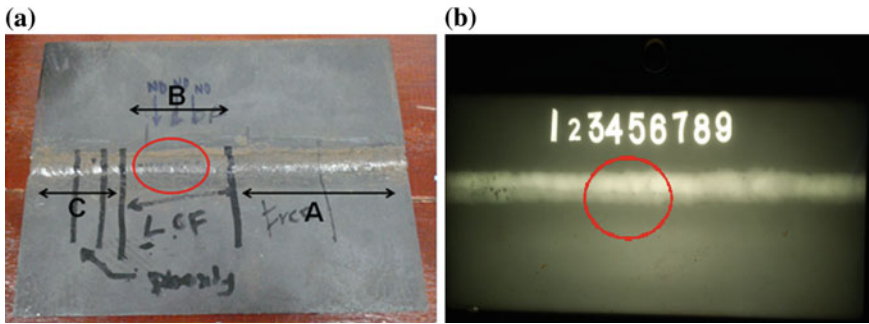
a Welded sample test specimen having LOF type of defect labeled A (no-defect position), B (defect position-in circle), C (no-defect position) and b radiographic image of welded sample with red circle showing the defect position
